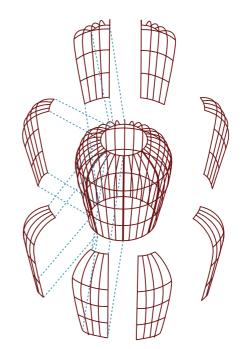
Cut the iron mould of the jar body into 8 uniform segments as shown.
